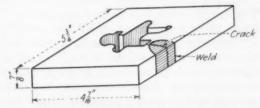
Weld repaired parts in most cases stand up as well as new parts. This part was repaired without any softening of the material.
